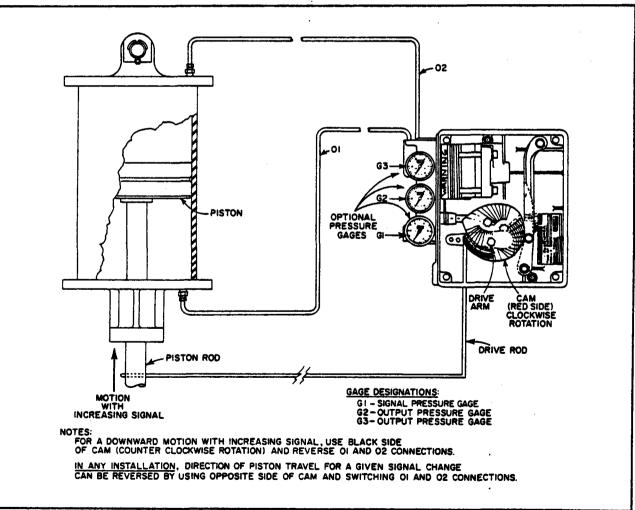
Typical Positioner Installation Mounted on Double-Acting Cylinder
